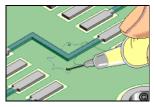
Inject Epoxy into the delamination blister using a Syringe Assembly.
